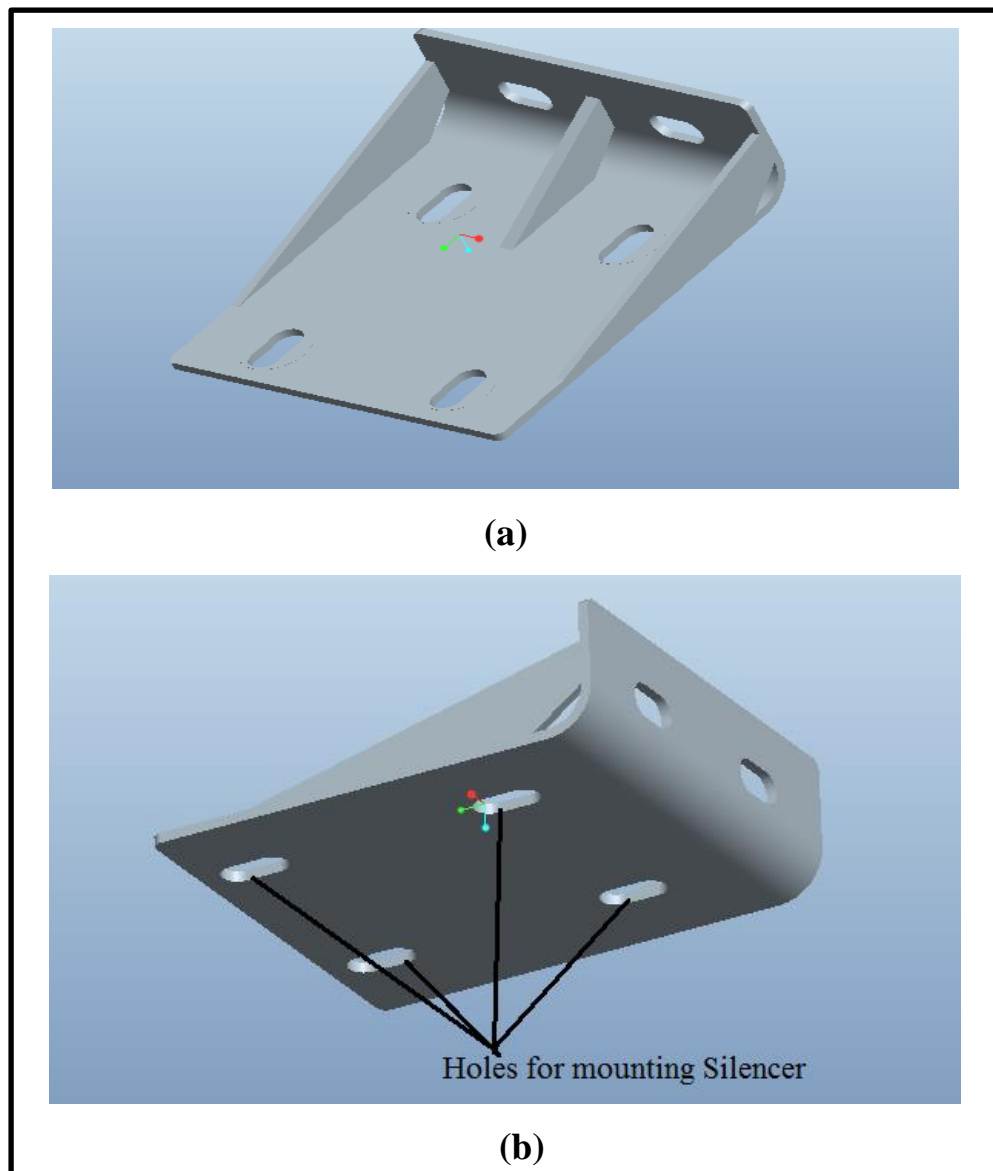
a) Isometric view of silencer mounting bracket model, (b) CAD model showing holes for mounting of silencer
